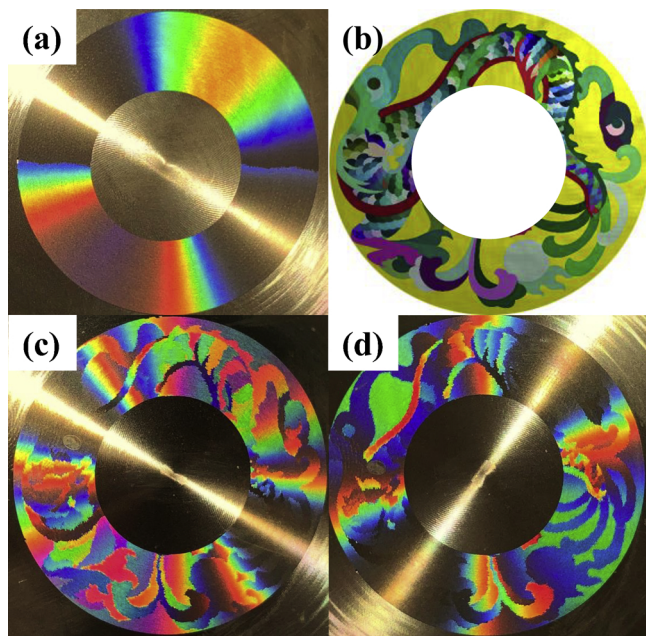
(a) Compensated calibration pattern; (b) designed image for verification experiment; (c) machined sample viewed from one particular direction; and (d) machined sample viewed from another direction.
